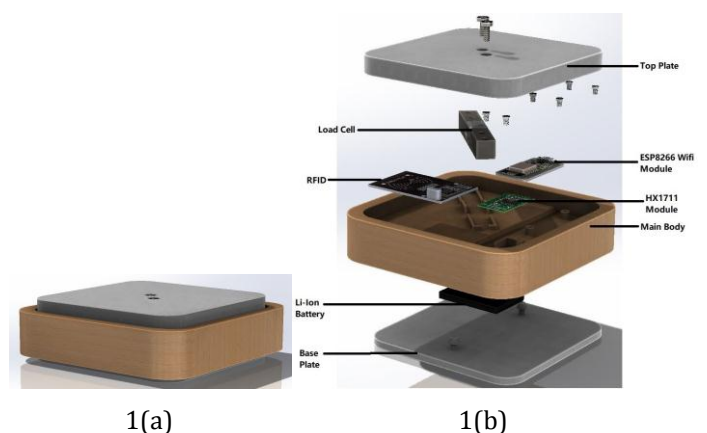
Mechanical Design 1(a) Compact View 1(b) Exploded view with labeled parts
